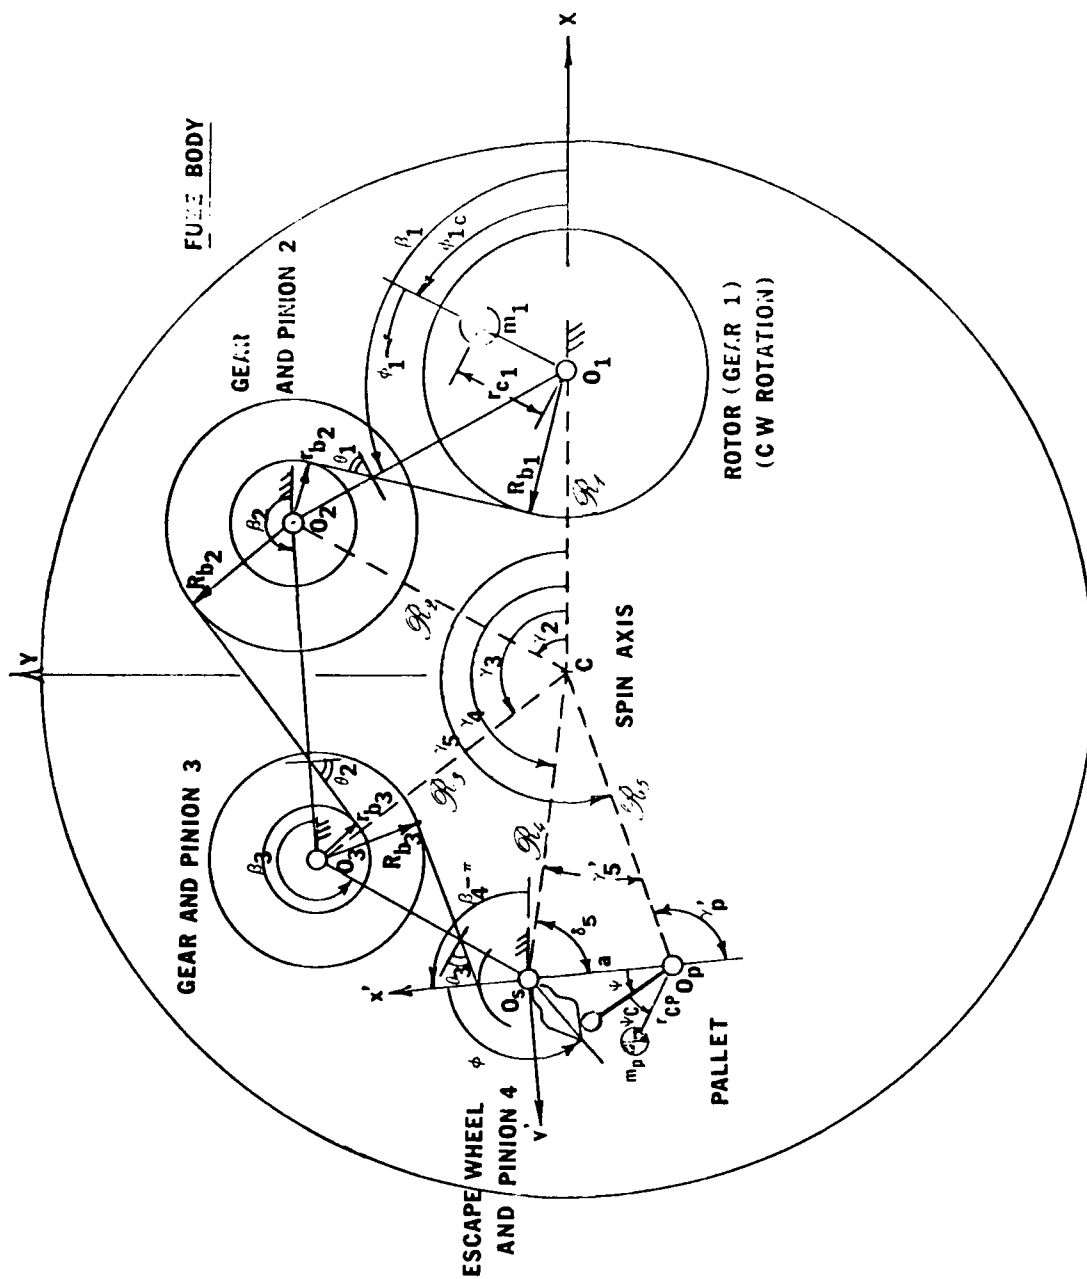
Rotor driven S&A device with three pass step-up gear train - configuration no. 1
